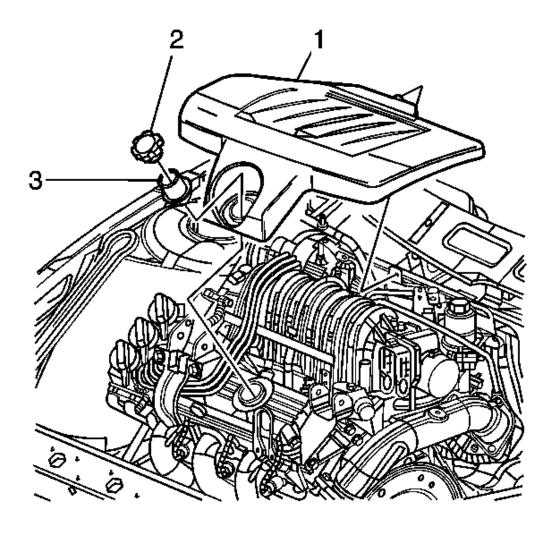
Oil Fill Cap, Oil Fill Tube & Fuel Injector Sight Shield (L26) Courtesy of GENERAL MOTORS CORP.
